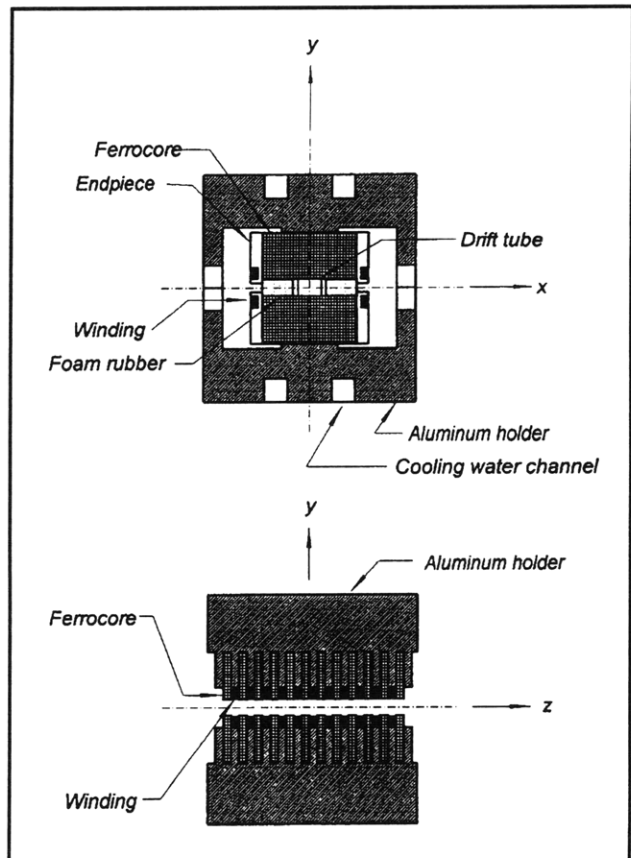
Wiggler assembly section drawings: (a) shows how the holders, coils, and drift tube are assembled. (b) illustrates the installation of the coils into the aluminum holders.
